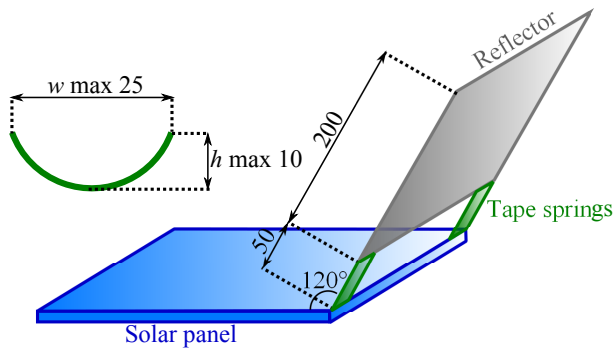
Deployed configuration of the reflector and maximum dimensions (in millimetres) of the tape springs.
